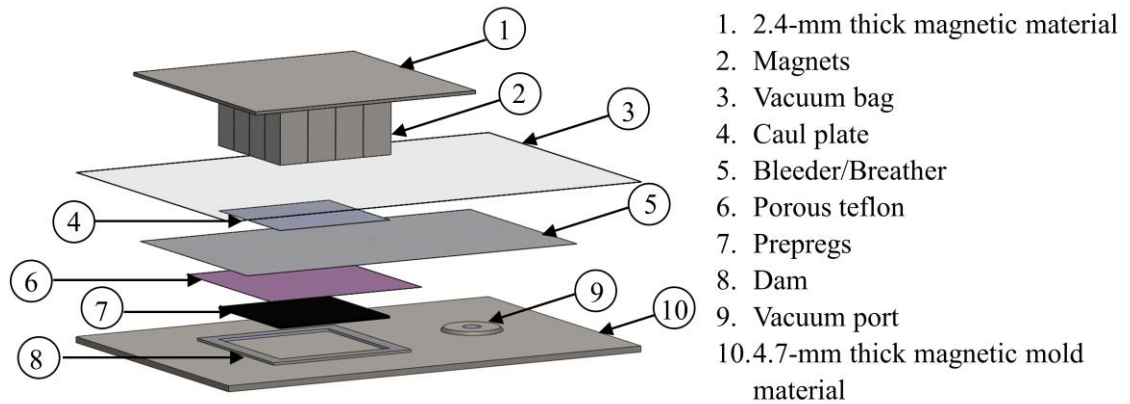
Schematic illustration of the new manufacturing technique used to fabricate composite parts.
